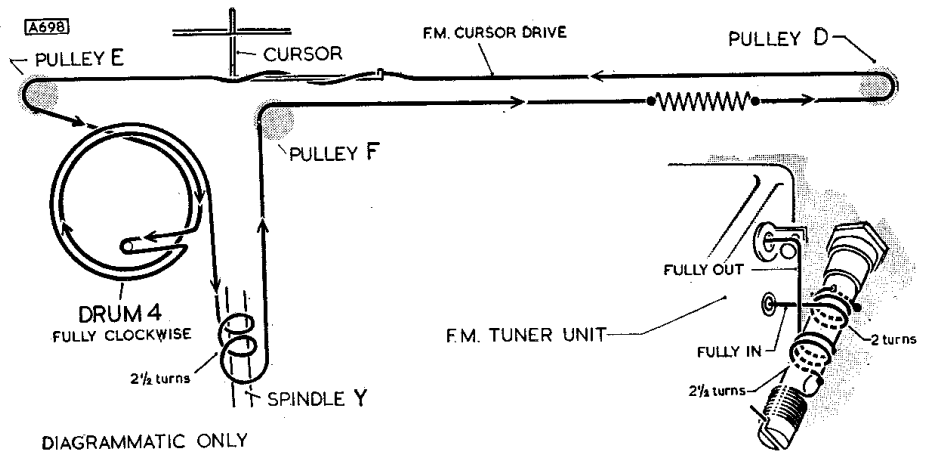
The F.M. cursor drive cord and tuner unit drive.
